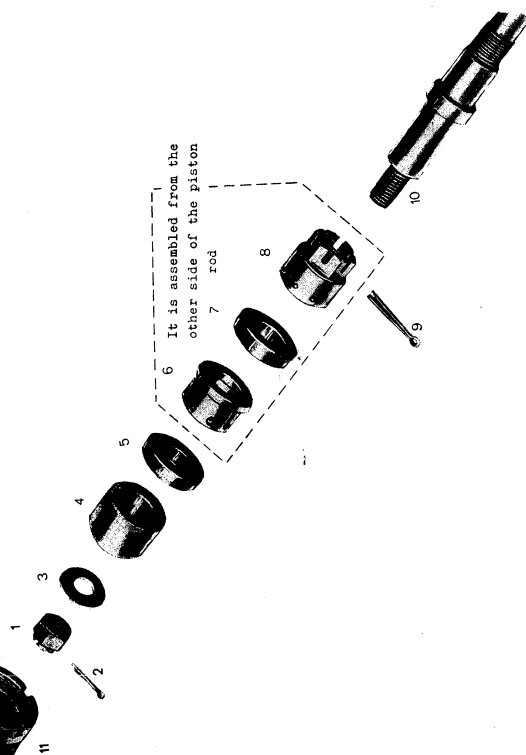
RECUPERATOR CYLINDER WITH PISTON AND PISTON ROD — DISMANTLED
